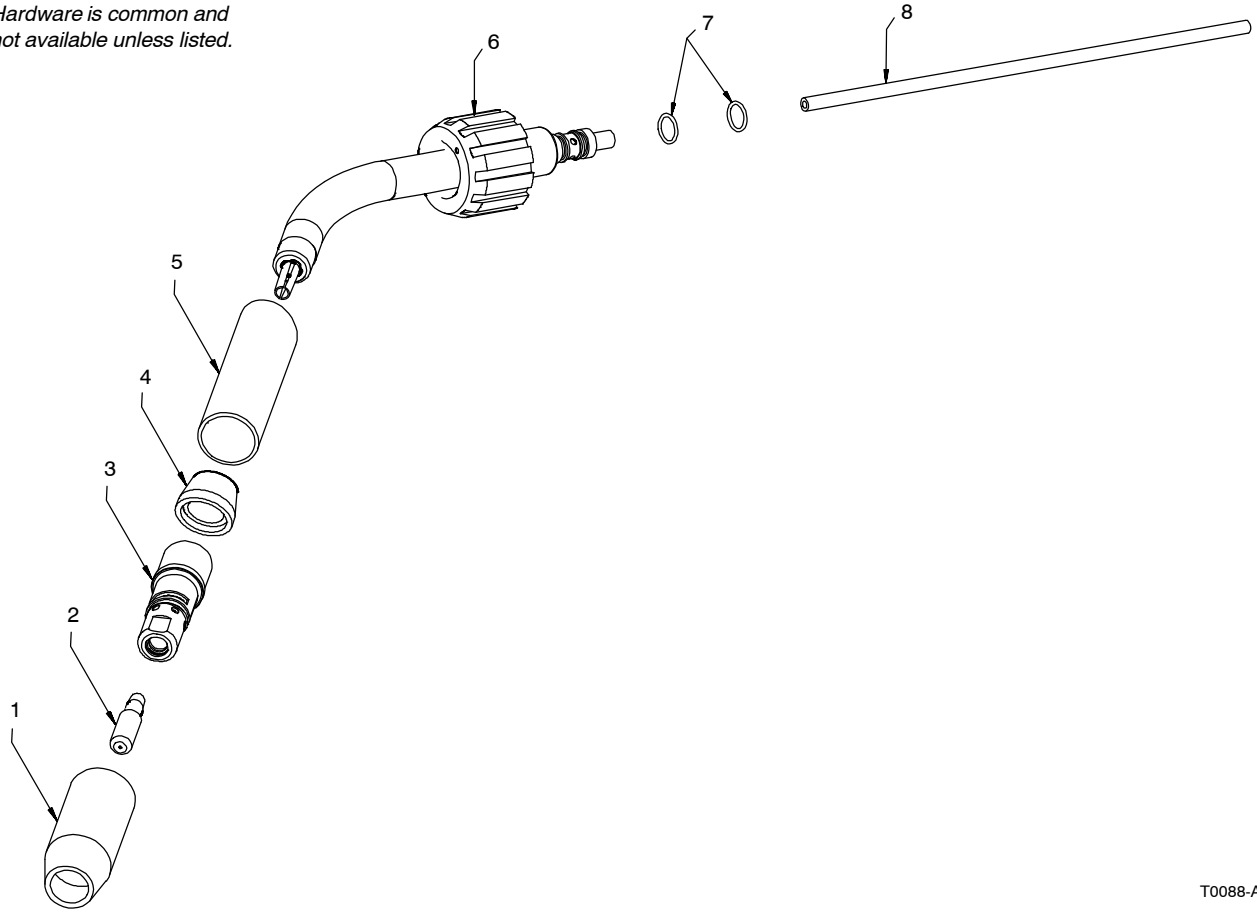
(Water) Head Tube Assembly Of XR-Aluma-Pro Gun (Figure 1-1 Item 1)
